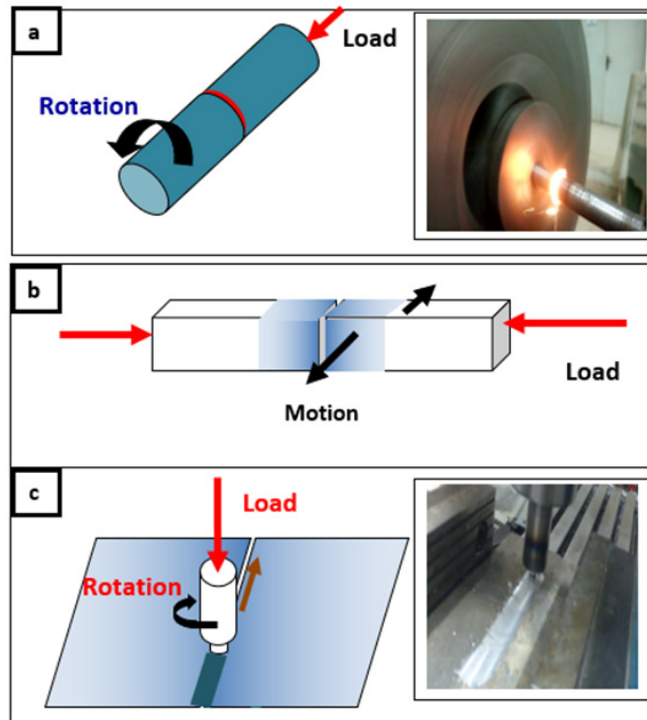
The three types of friction welding: (a): Rotary Friction Welding (RFW), (b): Linear Friction Welding, and (c): Friction Stir Welding (FSW).
